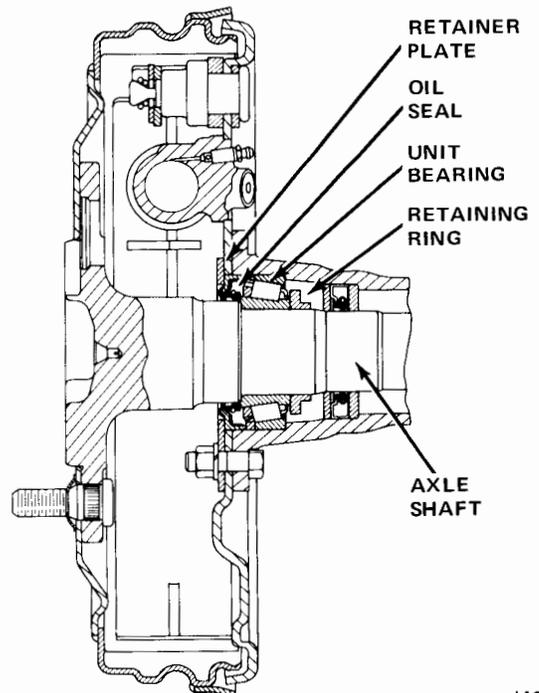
Rear Wheel Attaching Parts—Flanged and Tapered Axles
